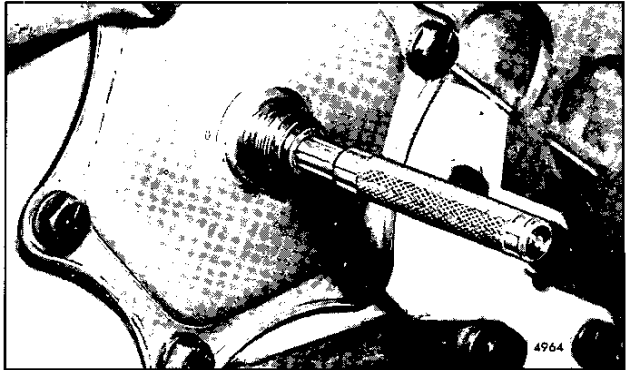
Checking Tachometer Drive Shaft Alignment
